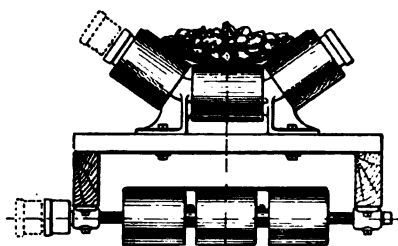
Support for Band Conveyor of the Robins Belt Conveying Co.
